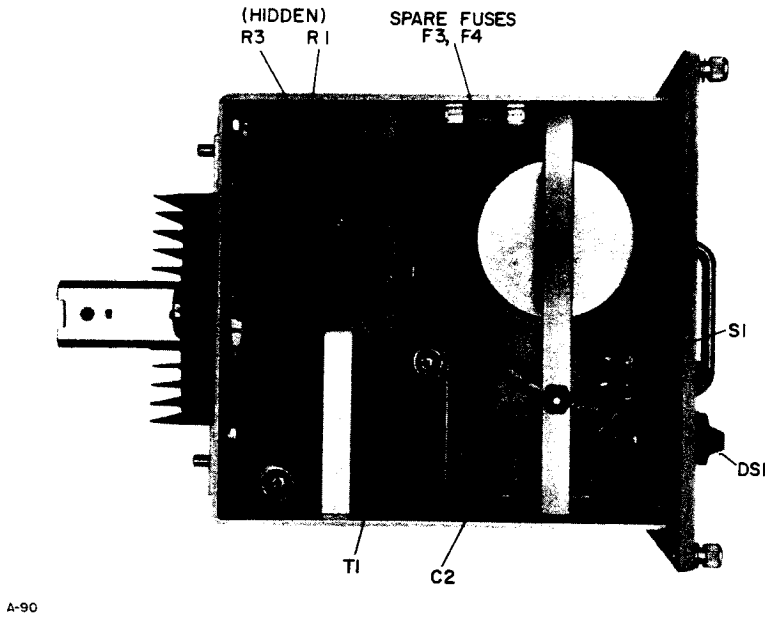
POWER SUPPLY, PP-4846/SRA - PARTS IDENTIFICATION (Top View)
